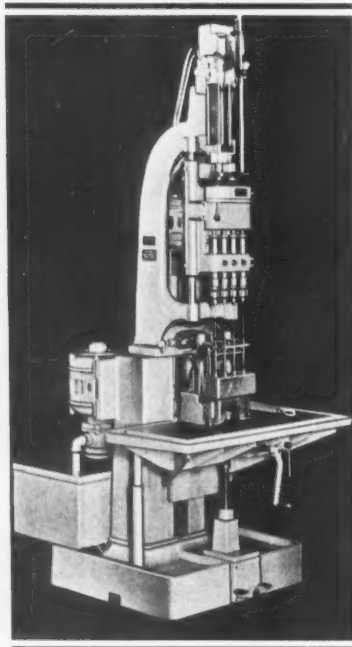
Allen Step Type Drilling Machine for Deep Holes
